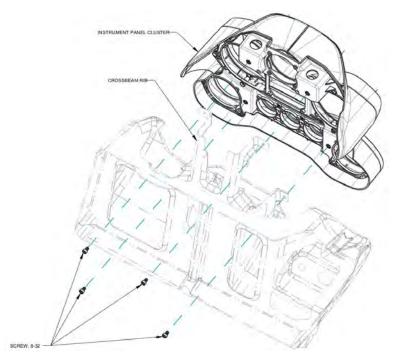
INSTRUMENT PANEL MOUNT ATTACHMENT DETAIL – EXPLODED VIEW
